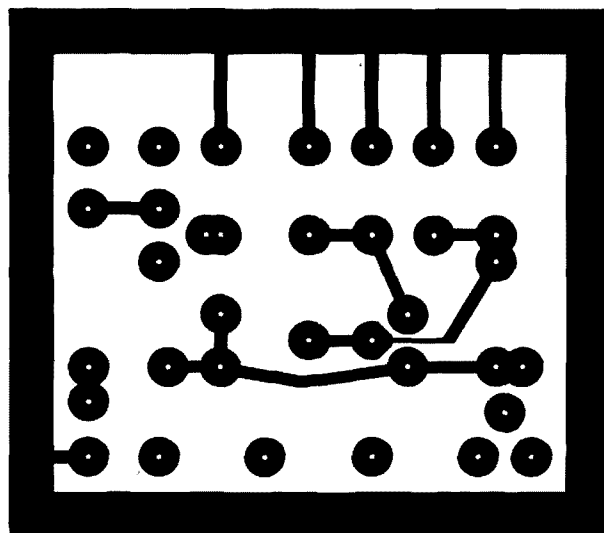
Printed-circuit board and parts placement for the inductance meter.
